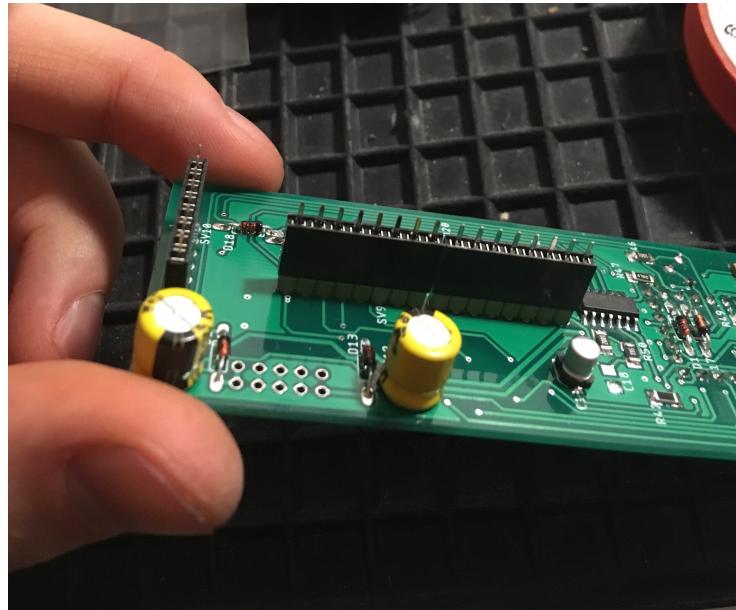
Now you take the loose PCB off the headers(the loose board that I have is the TOP board) and you solder all of the pins of one PCB
